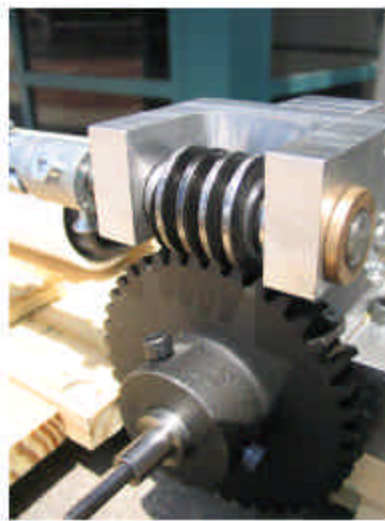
A picture showing the worm gear, worm gear mount, and cog.
